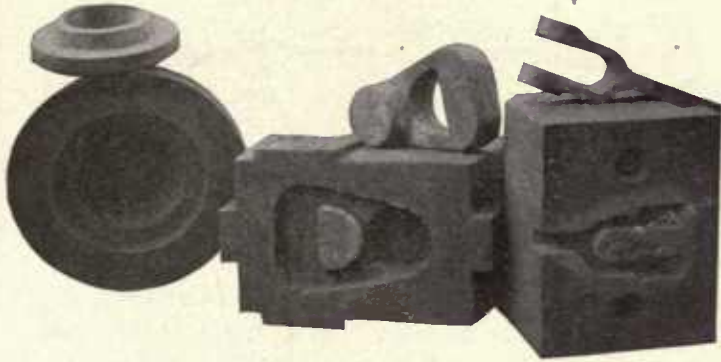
Samples of Steam Hammer Forgings and Dies.
